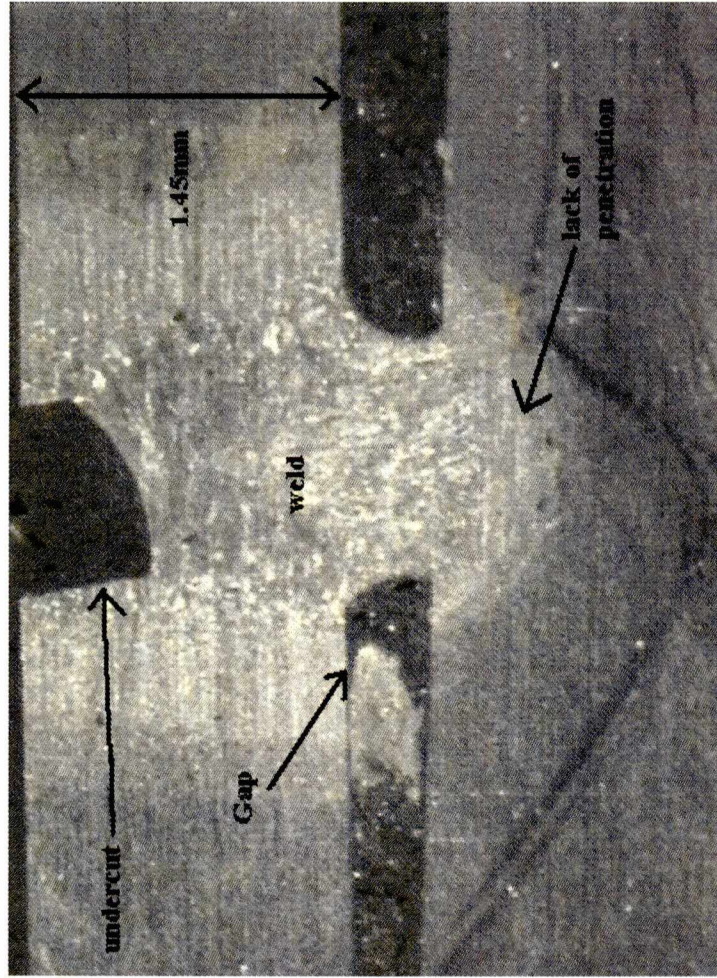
Gap Causing Lack of Penetration and Undercut. Weld performed on 80Y90T autobody component using a CO₂ laser and helium gas (1850W, 1000mm/min., +1mm focal position).
